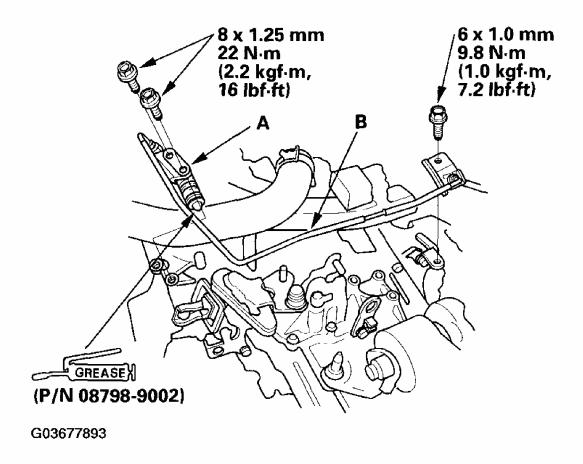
Identifying Tightening Torque Of Slave Cylinder And Clutch Line Bolts Courtesy of AMERICAN HONDA MOTOR CO., INC.
